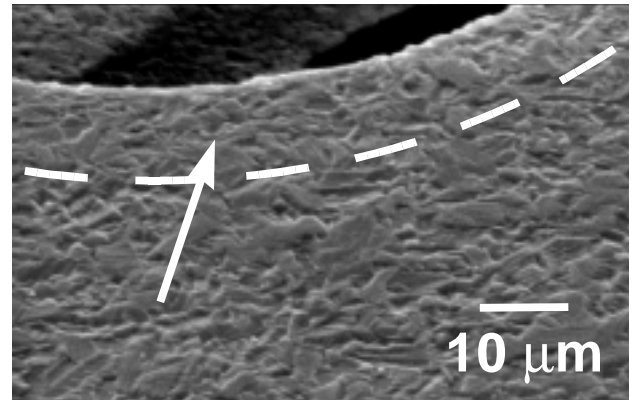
Back surface of gear operated to failure. Arrow and dashed line indicate bearing region.
